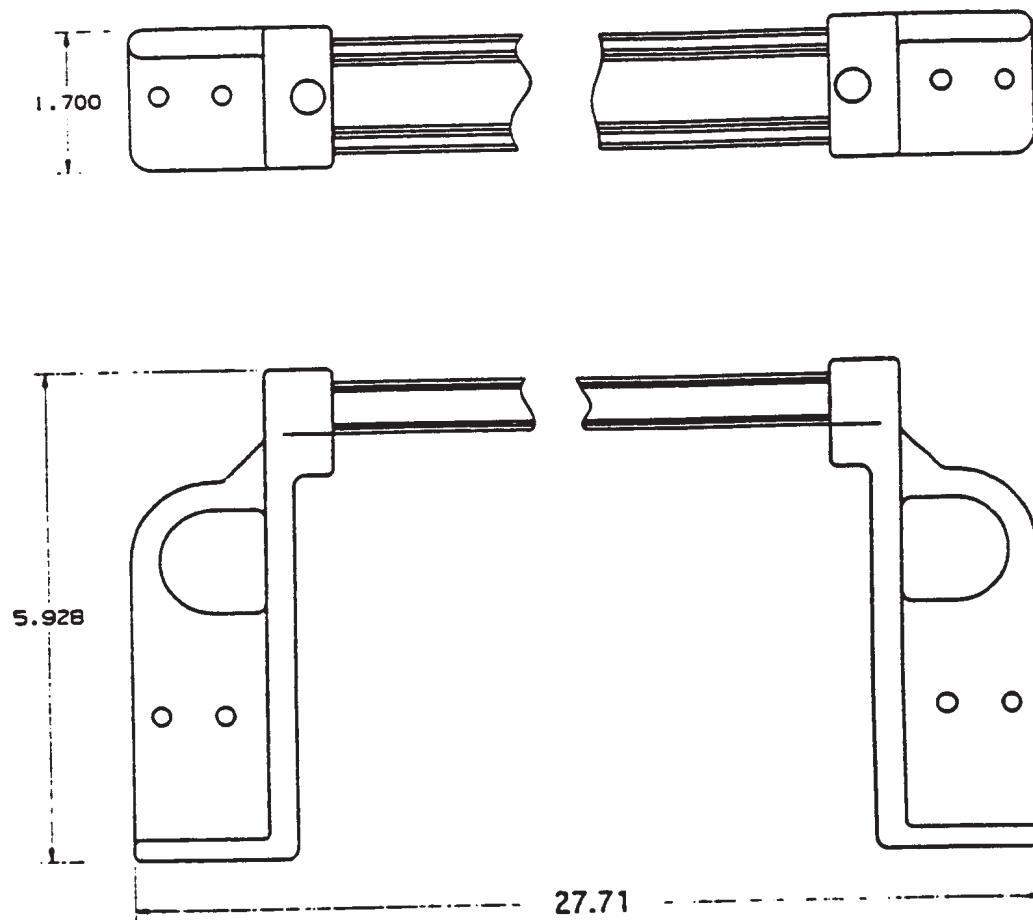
TOP MOUNTED CUSTOM LENGTH HANDRAIL ACCESS ENVELOPE
